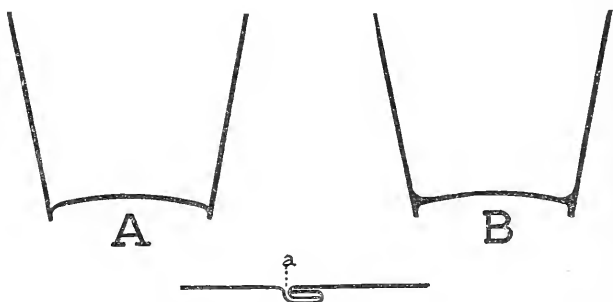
A, Improper joints in dairy utensils. B, Proper joints closed with solder.
